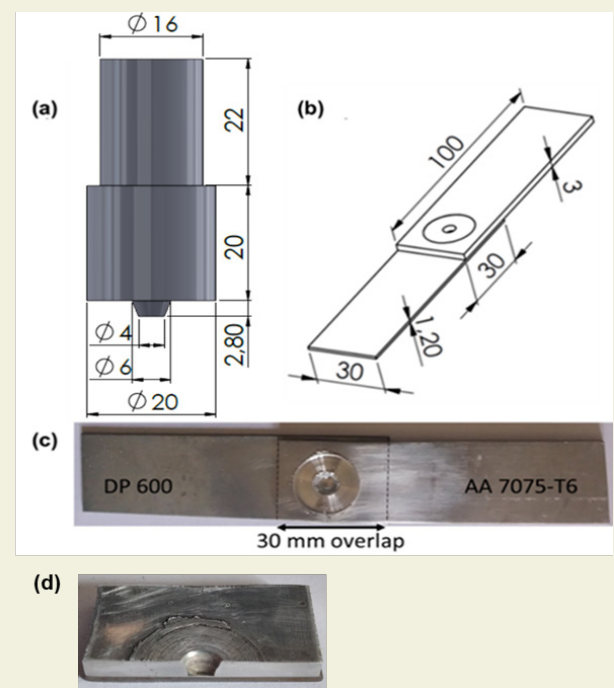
(a) Schematic diagram of the tool used in the FSSW process (b) Dimensions of the friction stir spot welded joint (c) pictorial image of the as welded sample. (d) pictorial image of the metallographic analysis sample
